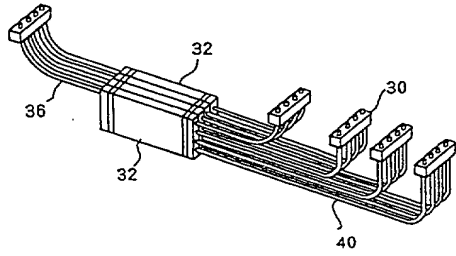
is a perspective view of a flexible electronic device assembly. The assembly includes a main body 30, which is a flexible strip with a series of conductive traces 40. A connector 32 is attached to one end of the main body 30. A cable 36 is connected to the connector 32. The main body 30 has a series of conductive traces 40 that are exposed at the other end. The assembly is shown in a bent configuration, indicating its flexibility.
